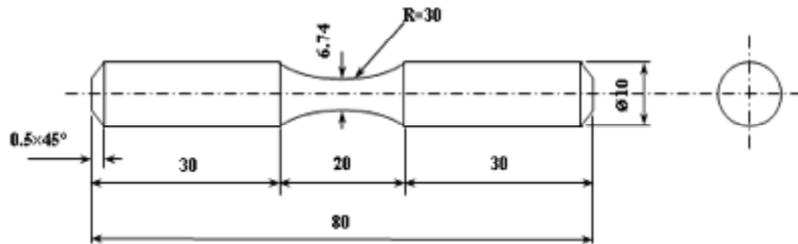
Specimen geometry and dimensions for fatigue test (all dimensions in mm)
